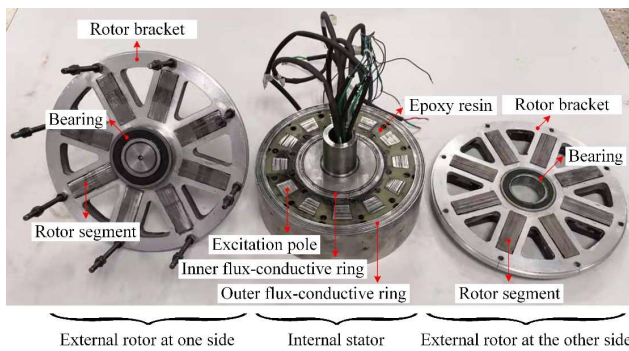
Prototype of the three-phase 12/8 ADS-SRM.
